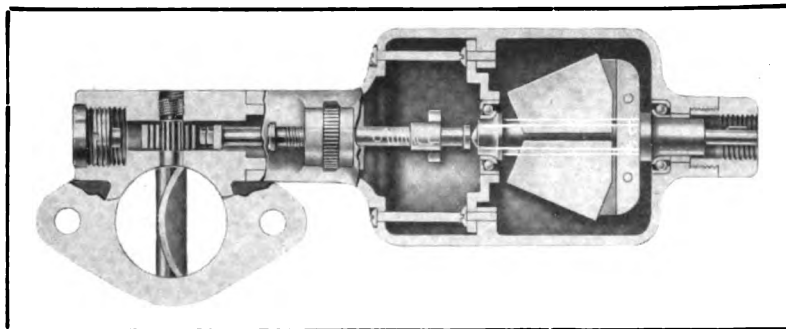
Sectional View of the Pierce Motor Governor, Which Is Operated by the Movement of the Weights on the Shaft.
